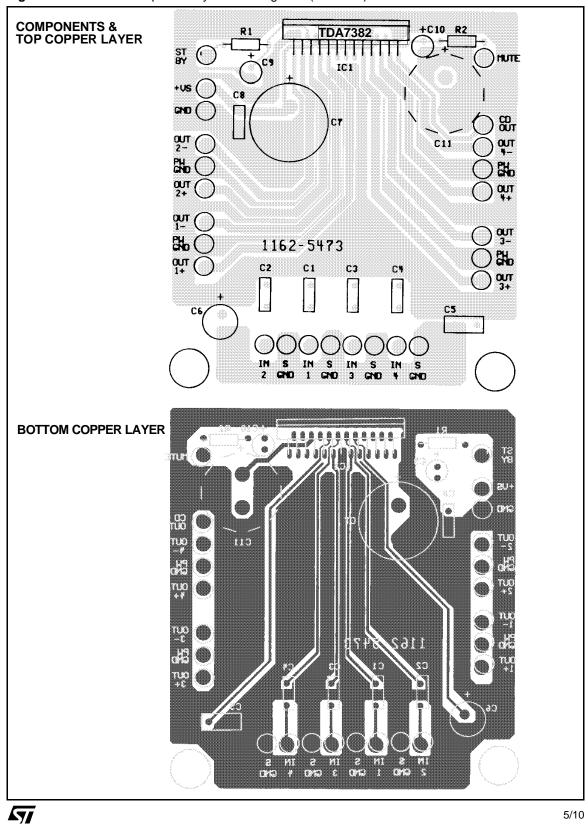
P.C.B. and component layout of the figure 1 (1:1 scale)
